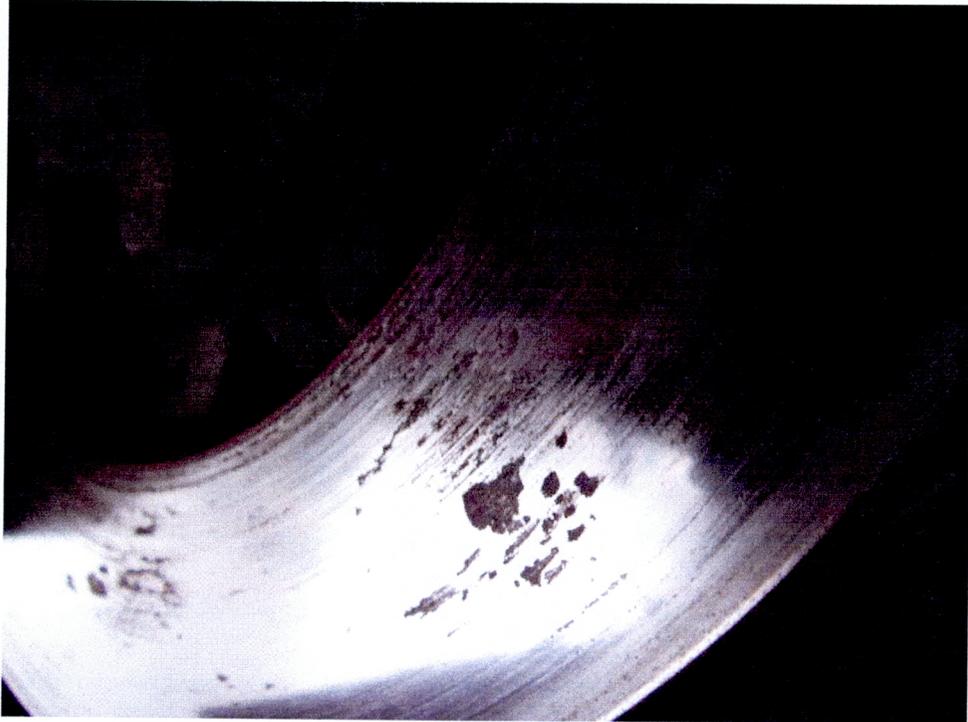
Another View of the Pitting on the Left Rear Rotor
